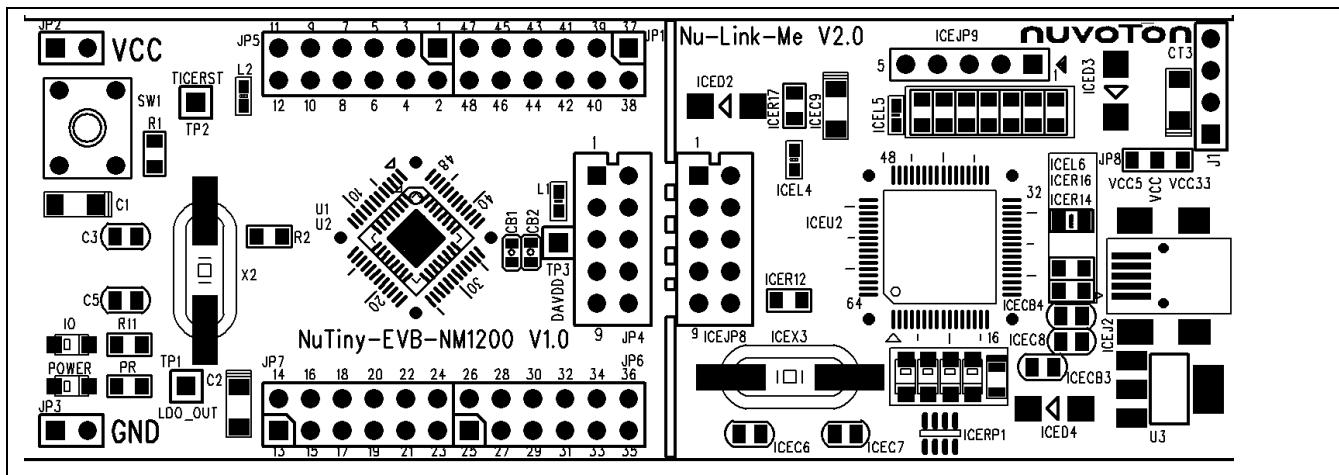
NuTiny-EVB-NM1200 PCB Placement
